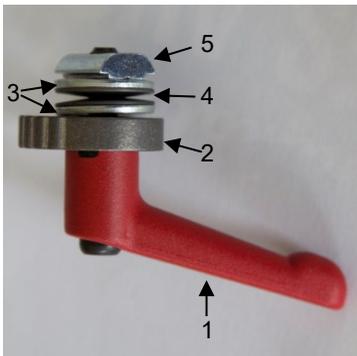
Clamping unit with clamping lever, locking washer, 2 washers, 2 disc springs and sliding block
